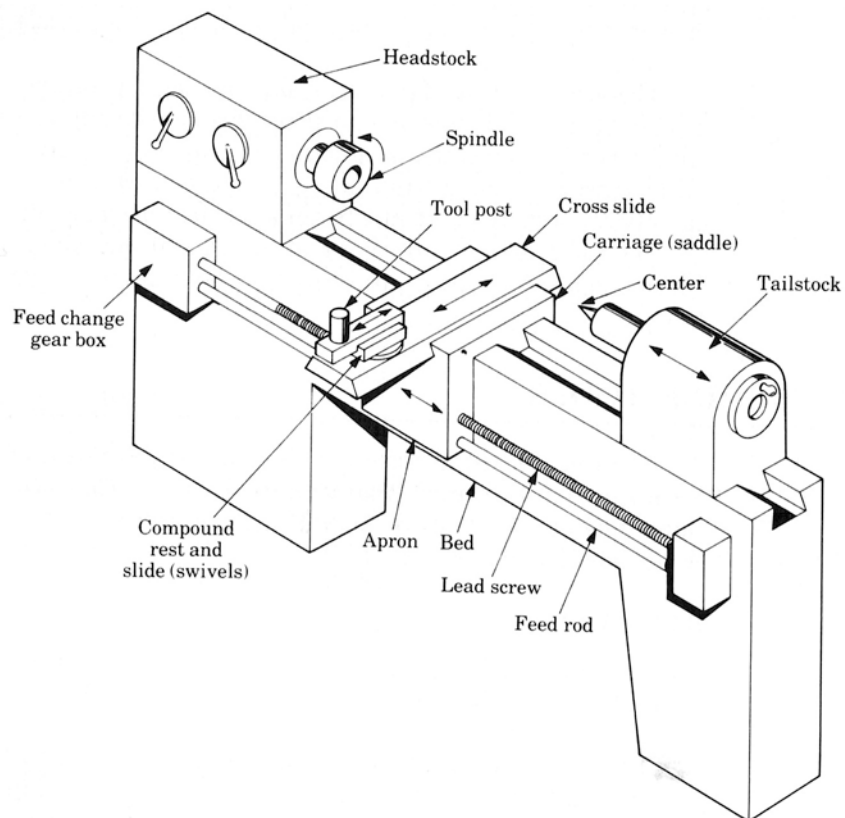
Schematic of a lathe indicating various features including the longitudinal and cross SLIDES which allow the tool to remove metal from different surfaces of the workpiece.
